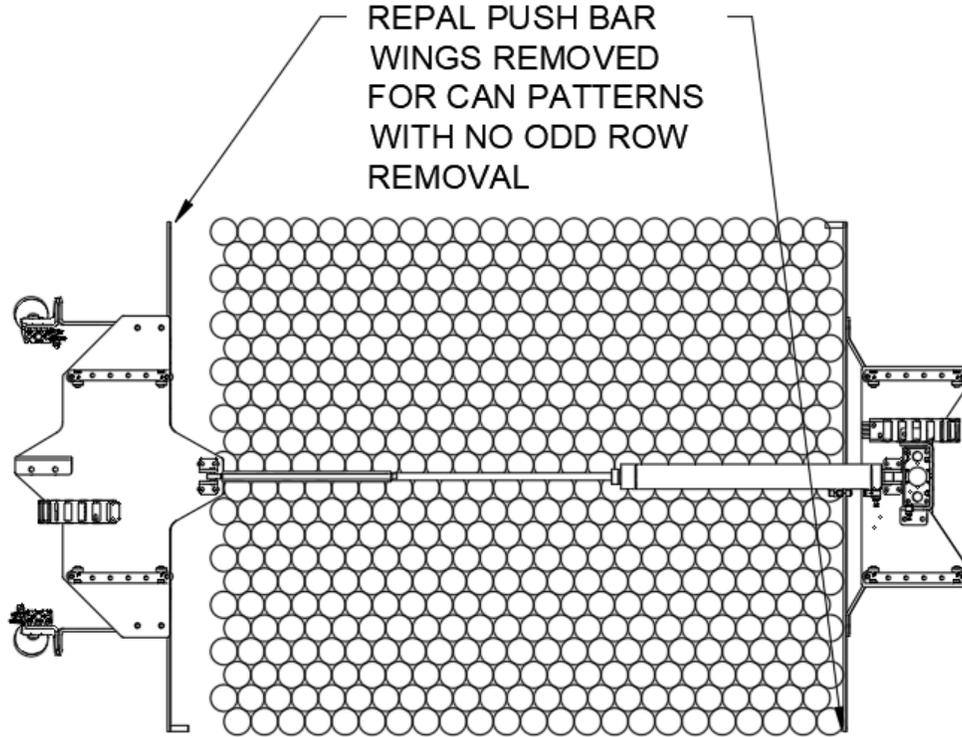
Push Bar Wings Removed for Can Patterns with No Odd Row Removal
